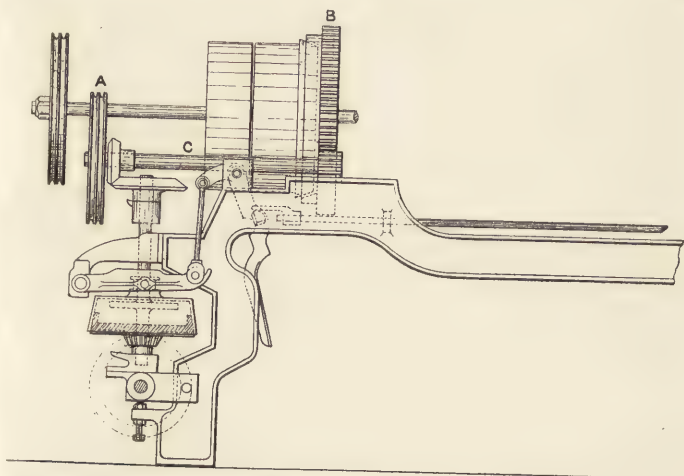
ELEVATION SHOWING THE BACKING-OFF AND DRAWING-UP FRICTIONS IN THE MULE HEADSTOCK.
